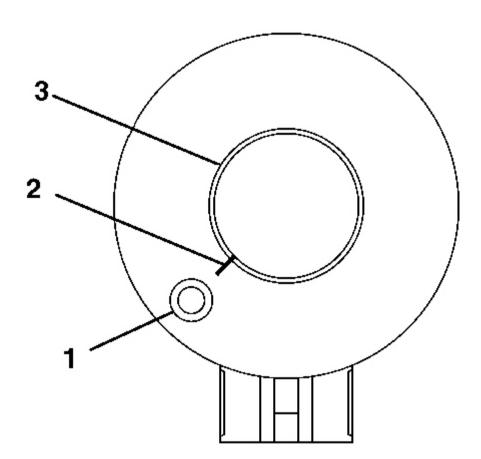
Steering Wheel Position Sensor Rotor Flange Cuff, Centering Pin Hole And Alignment Mark & Proceed To Step 17
